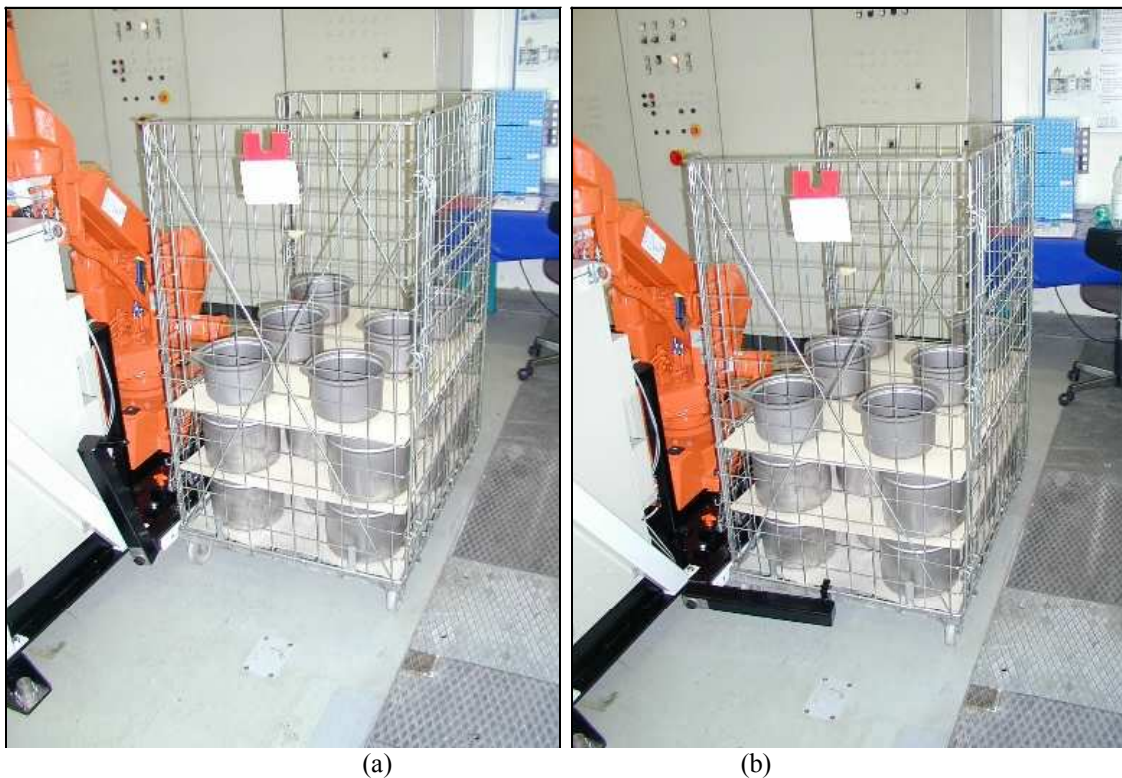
Clamping mechanism for work piece bins using eccentrically mounted lever arm in positions (a) open and (b) closed and clamped. The parts bins used in the pilot system at WMF are the container carts shown in the photographs.
